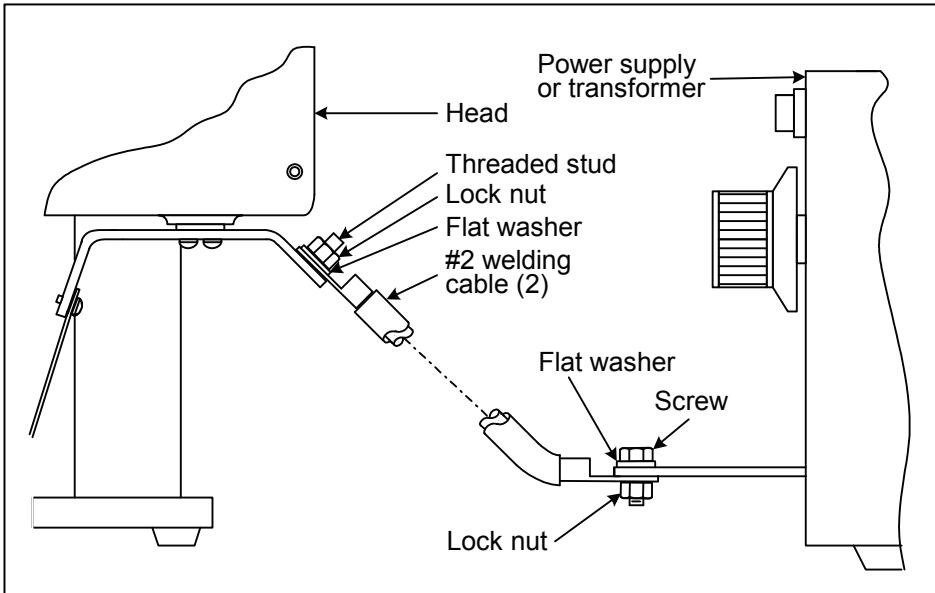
Welding Cable / Transformer Power Connections
